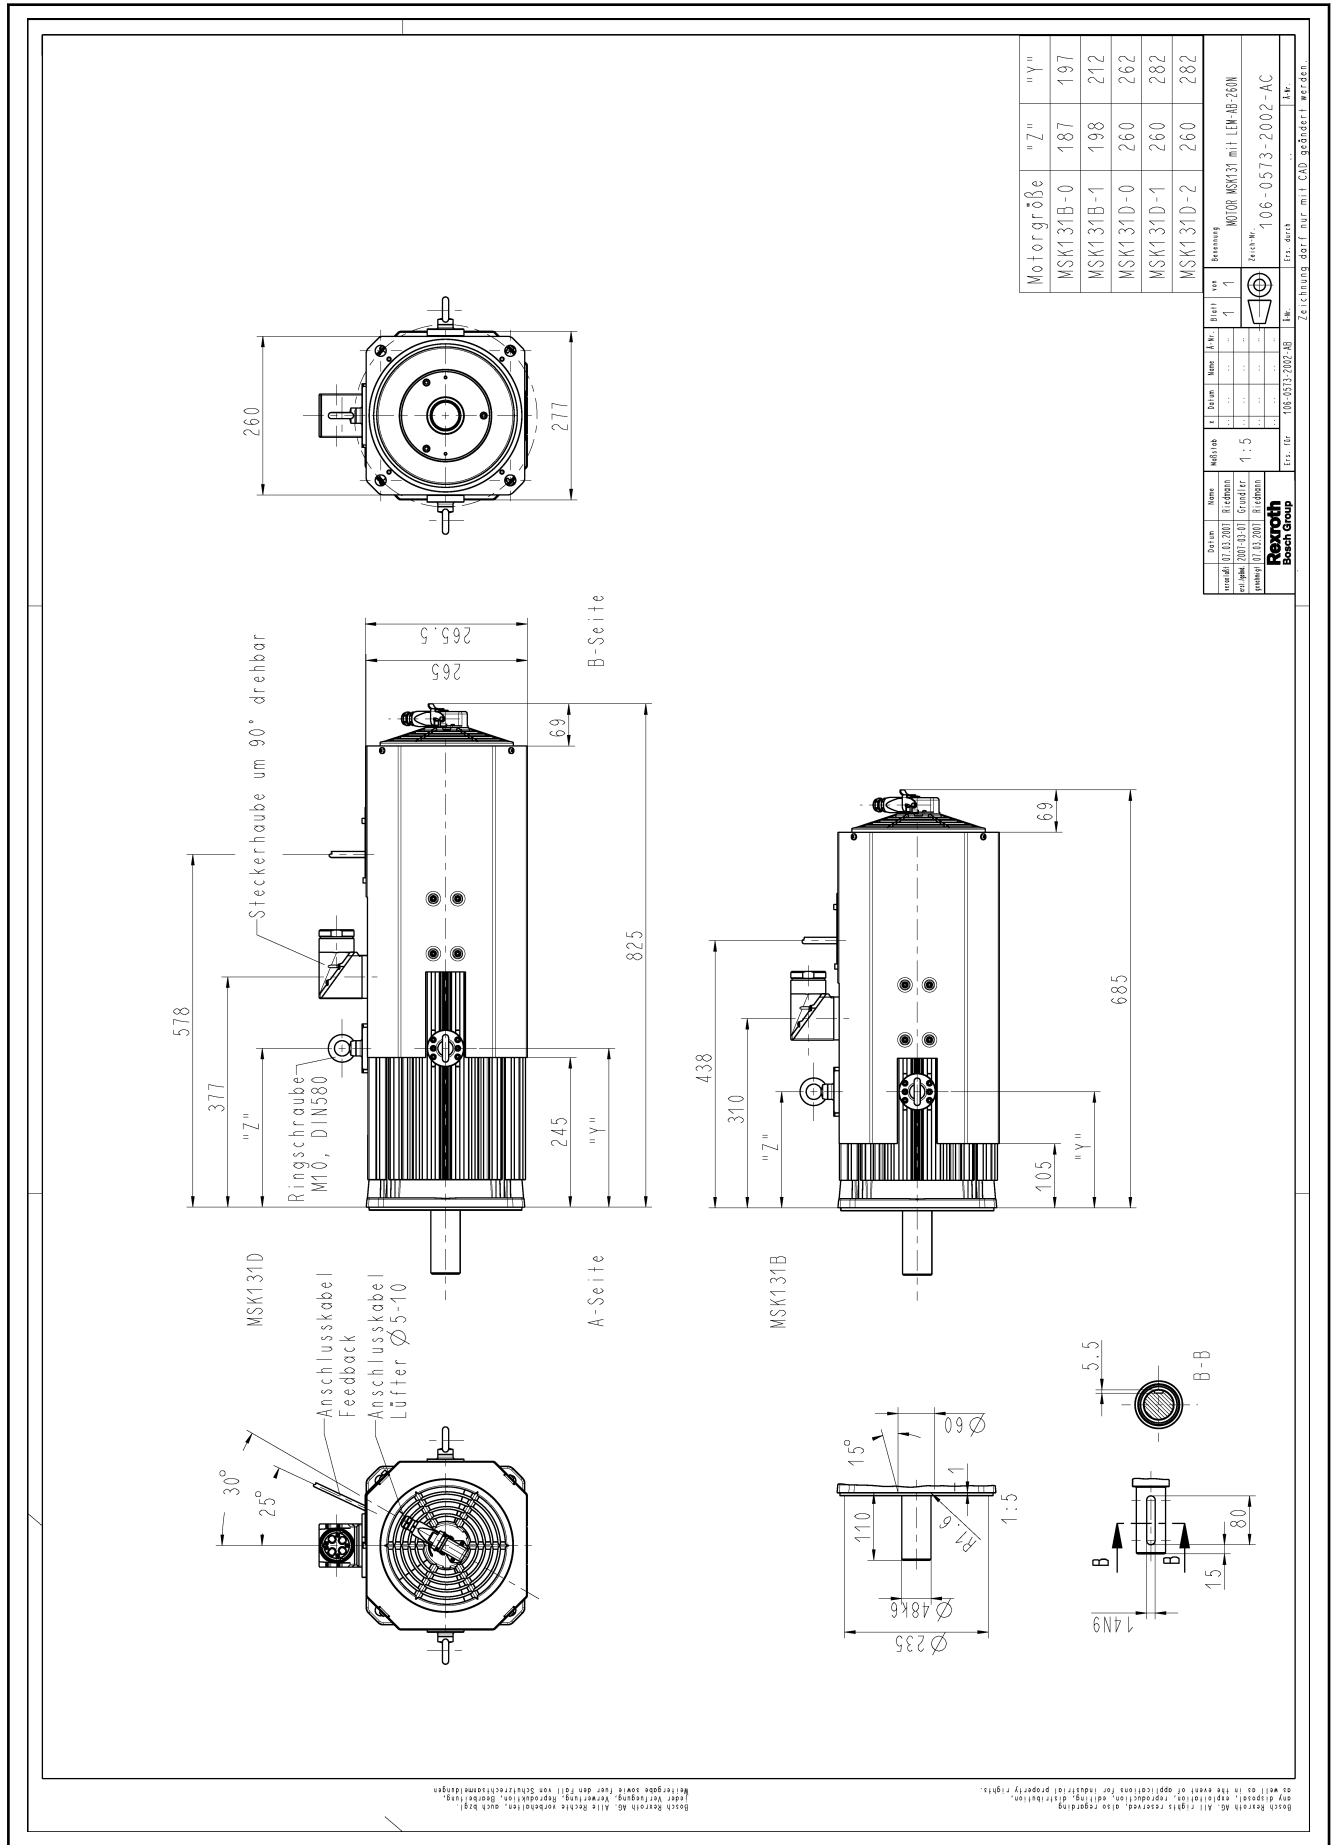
Dimension sheet MSK131 with axial fan unit
